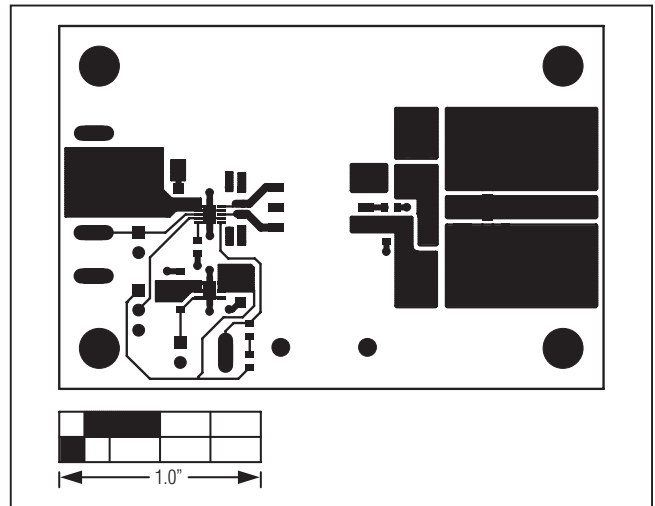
MAX13256 EV Kit PCB Layout—Component Side
